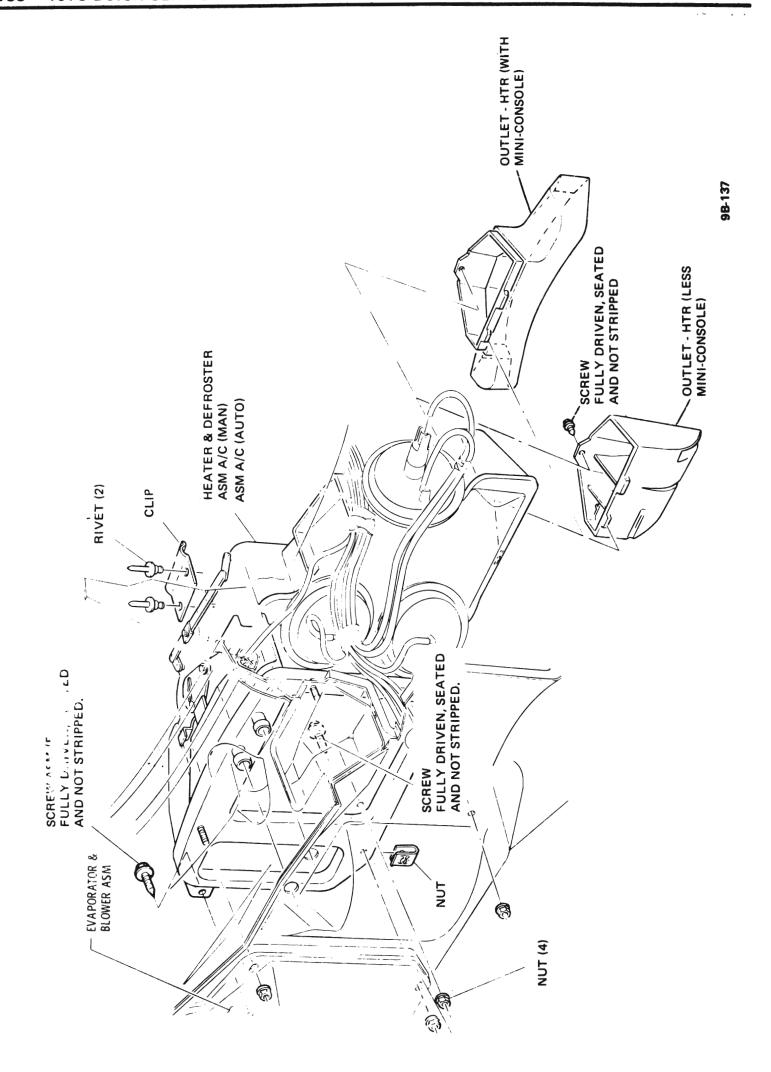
B-178 A/C Heater and Defroster Assembly - B-C-E Series
